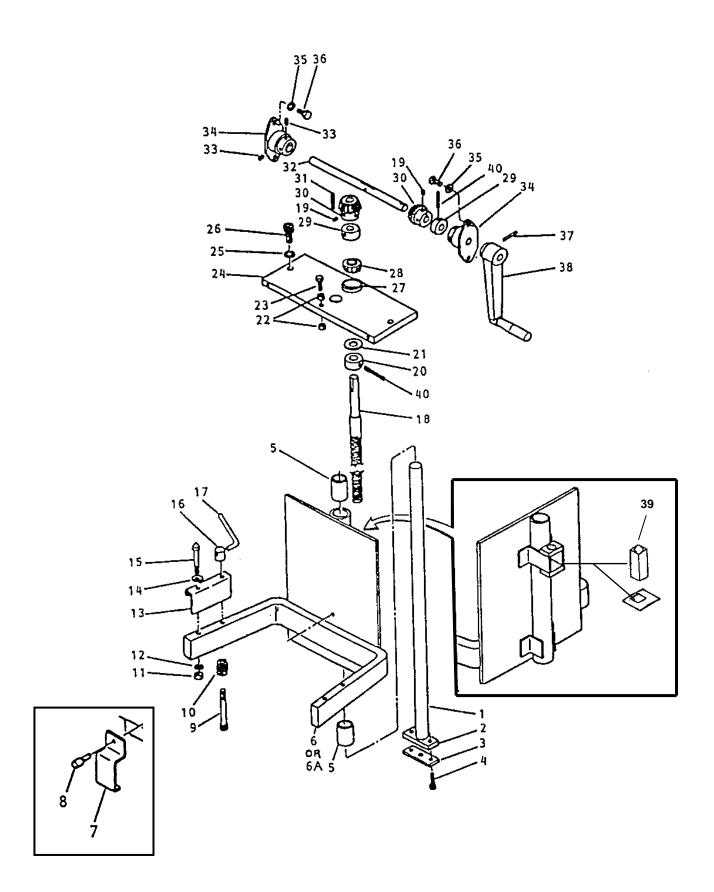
BOWL SUPPORT, BOWL SUPPORT CRANK AND BOWL LOCKDOWN ASSEMBLY
